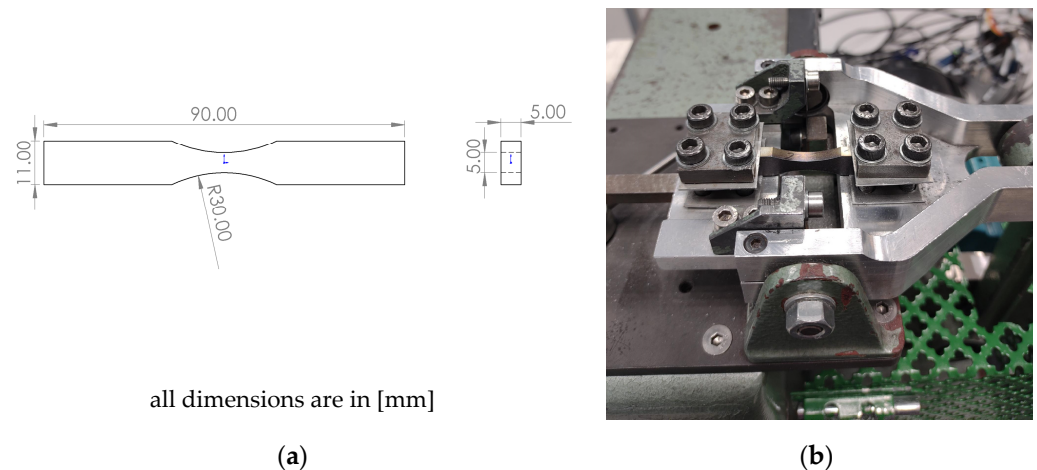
Bending fatigue sample after machining: (a) dog bone sample geometry; (b) test setup for the four-point bending test.
